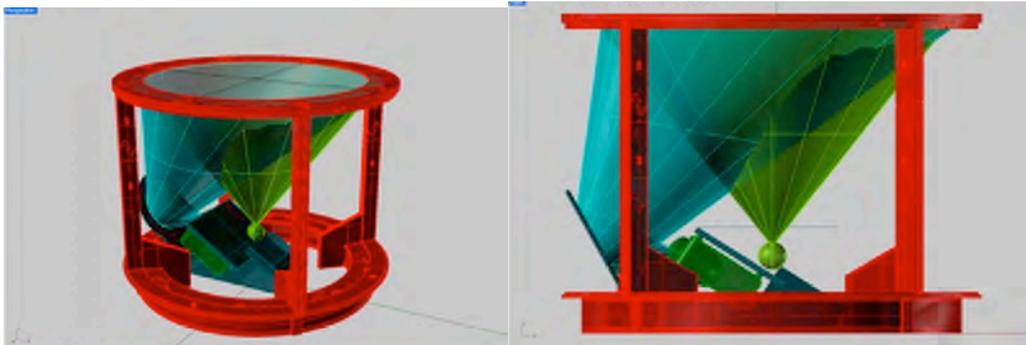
Executive drawings of the table prototype showing the equipment inside.
